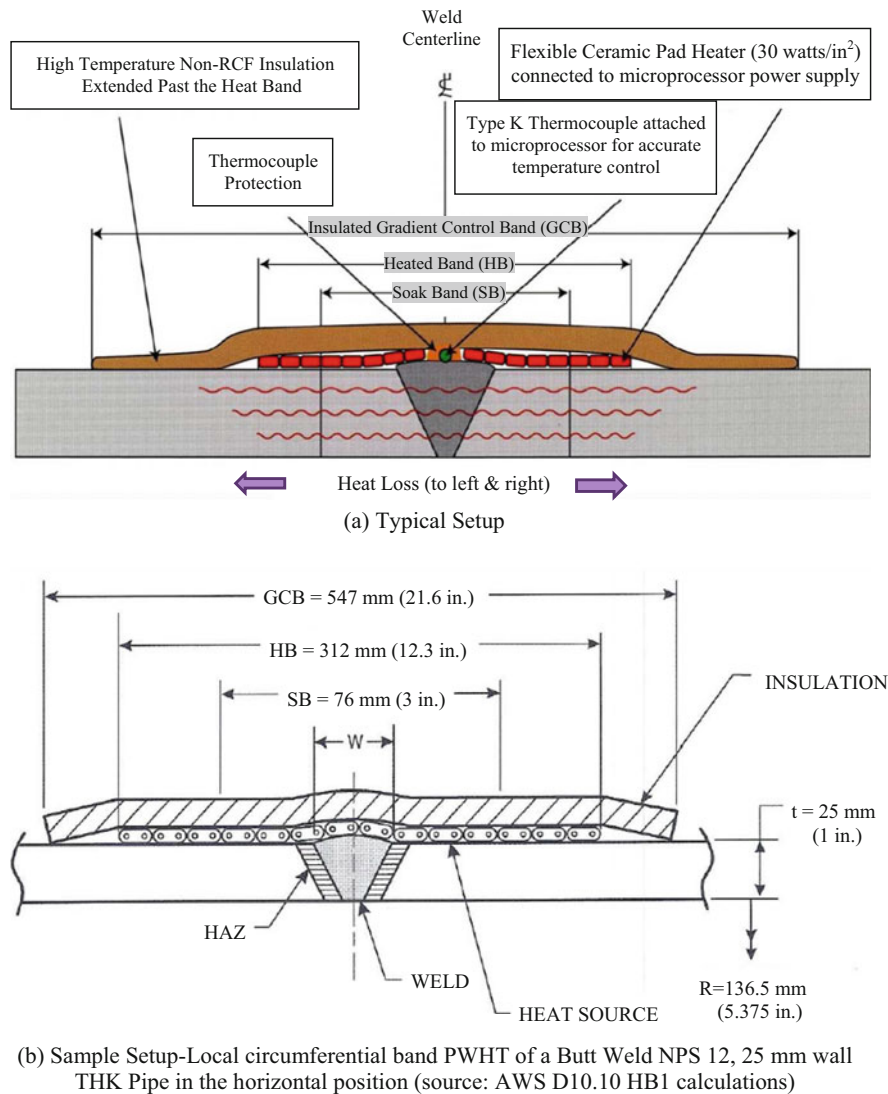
Typical band setup for local PWHT. (a) Typical setup. (b) Sample setup – local circumferential band PWHT of a butt weld NPS 12, 25 mm wall. THK pipe in the horizontal position (source: AWS D10.10 HB1 calculations). (Source: AWS D10.10)
